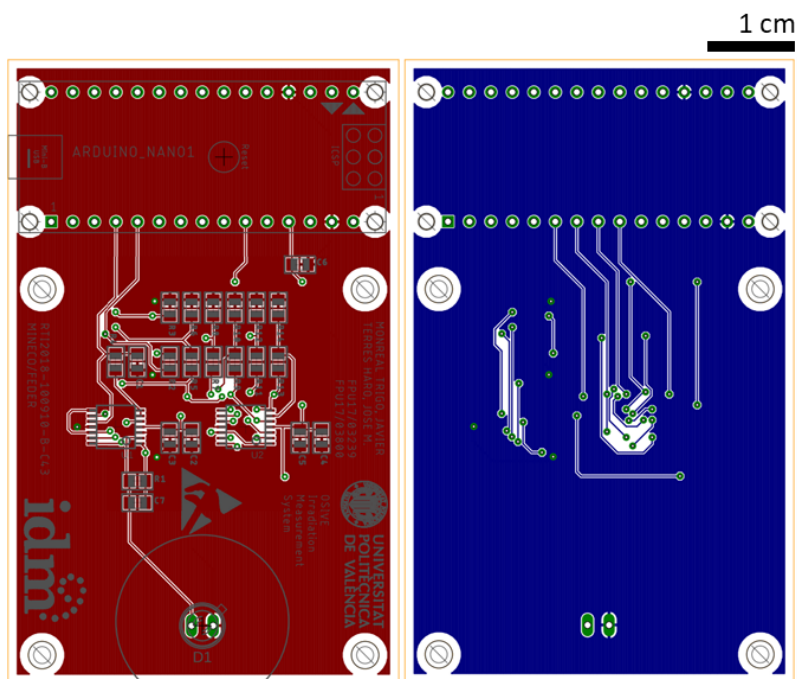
OSIVE IMS PCB top layer (left) and bottom layer (right).
